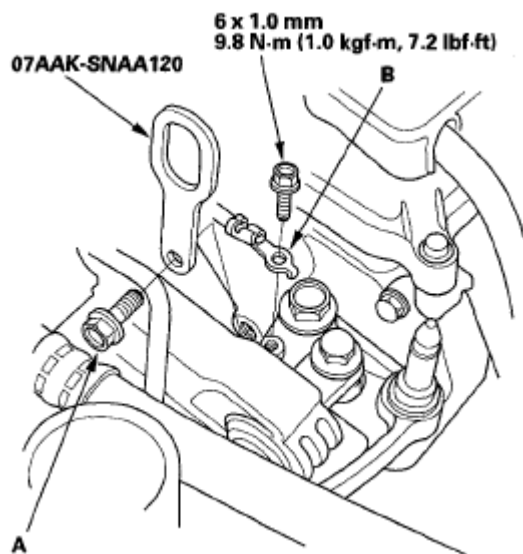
Identifying Engine Hanger Plate And Bolt (With Torque Specifications)
